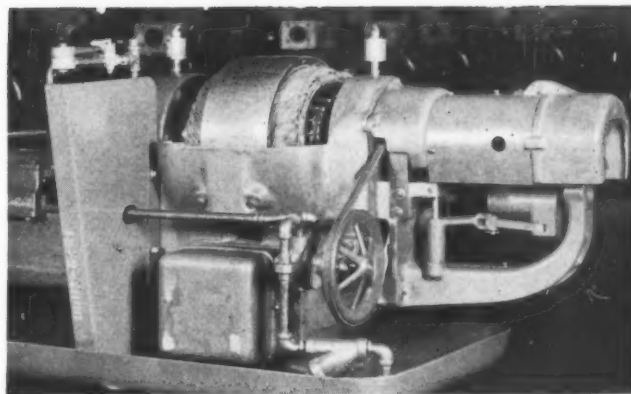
Inertia in reversing is reduced in lathe with motor on spindle
